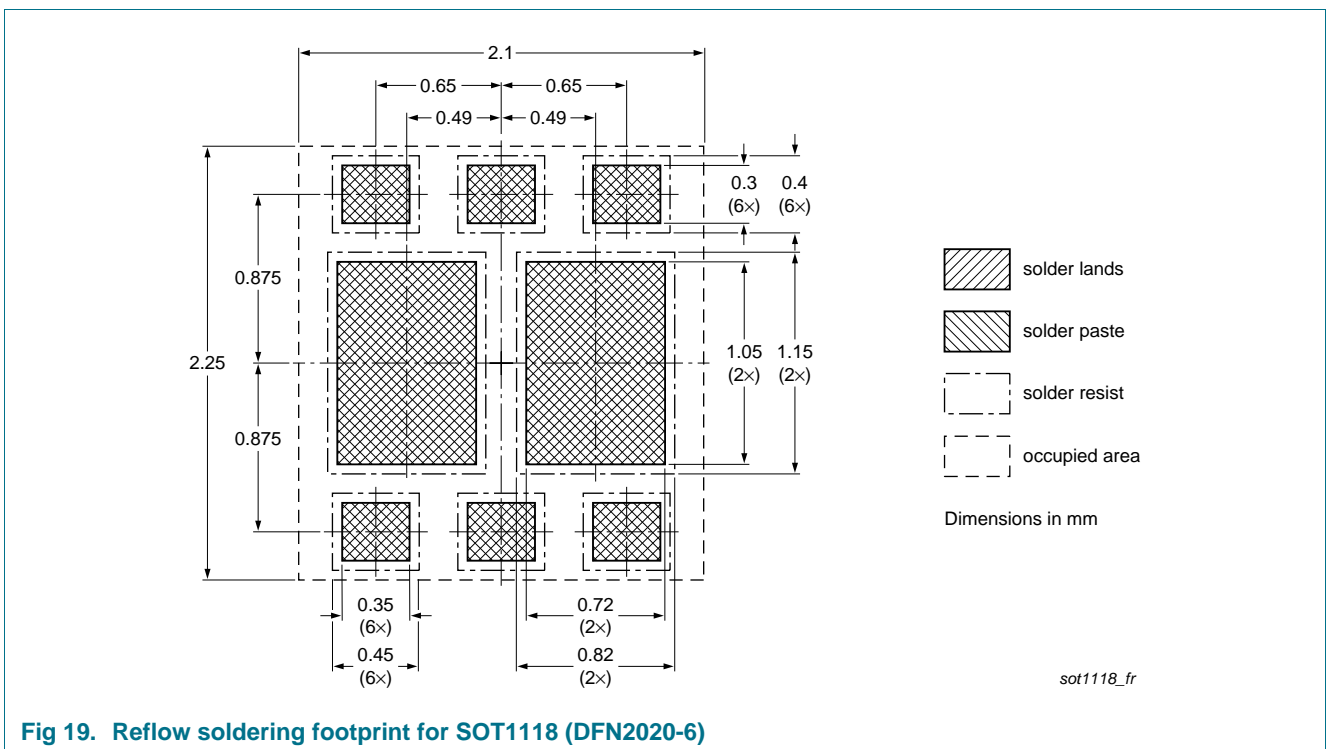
Reflow soldering footprint for SOT1118 (DFN2020-6)
